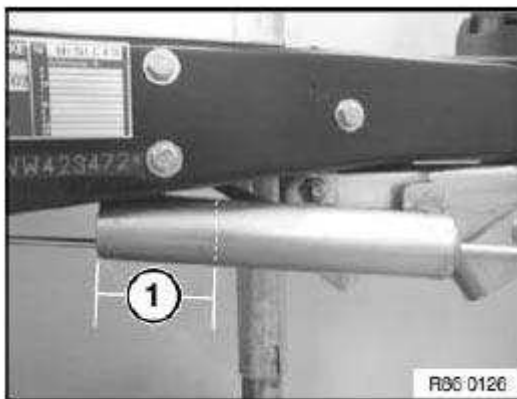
Identifying Distance Between End Of Support Tube-Internal Washer
